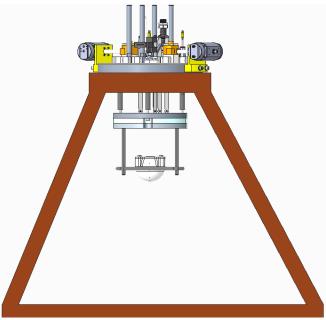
Overview of HE Support load test with Top Cover secured to Barolo Assembly Stand.
